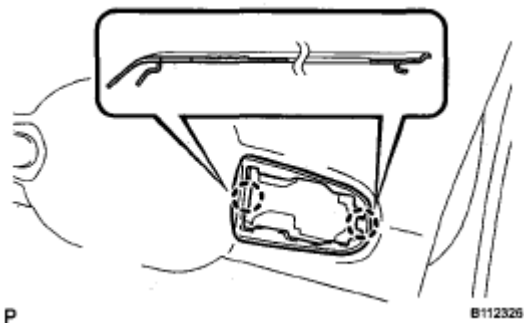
Identifying Rear Door Outside Handle Pad Claws
